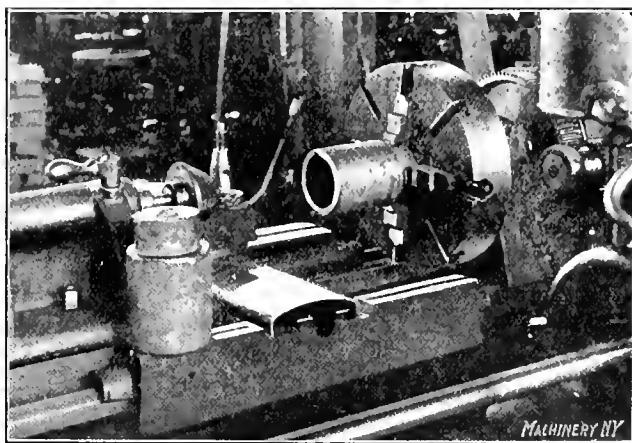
First Operation on Pistons: Breaking the Inside Edge, Roughing Outside and Cutting Off Chucking Plug
